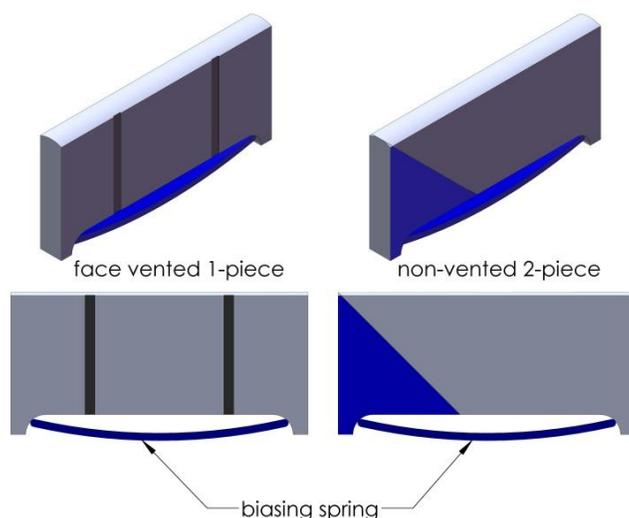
Test seal geometries, one-piece with a high-pressure vent (left) and non-vented two piece design (right).
